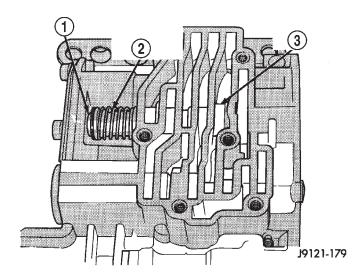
Shuttle Valve E-Clip And Secondary Spring
